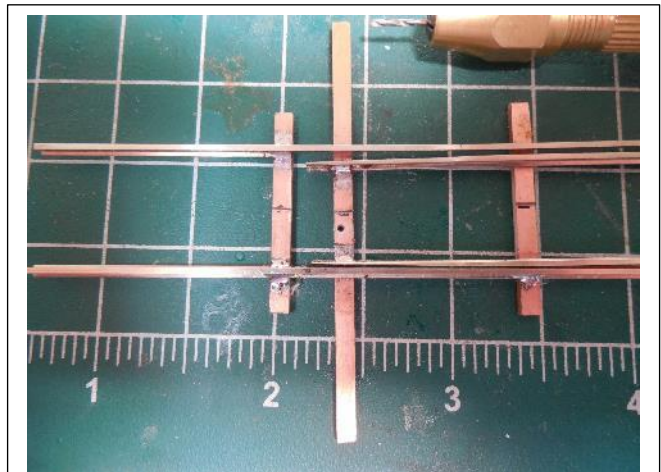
Throw bar with both points soldered and center hole drilled #63
